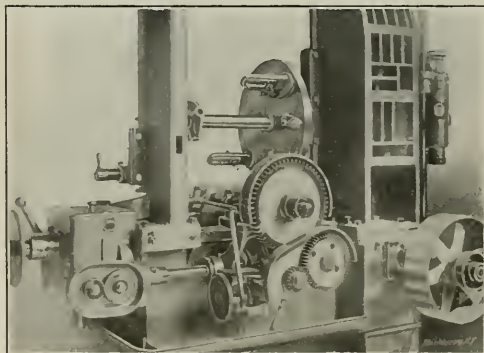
Eberhardt Automatic Gear Cutter, Rear View.
